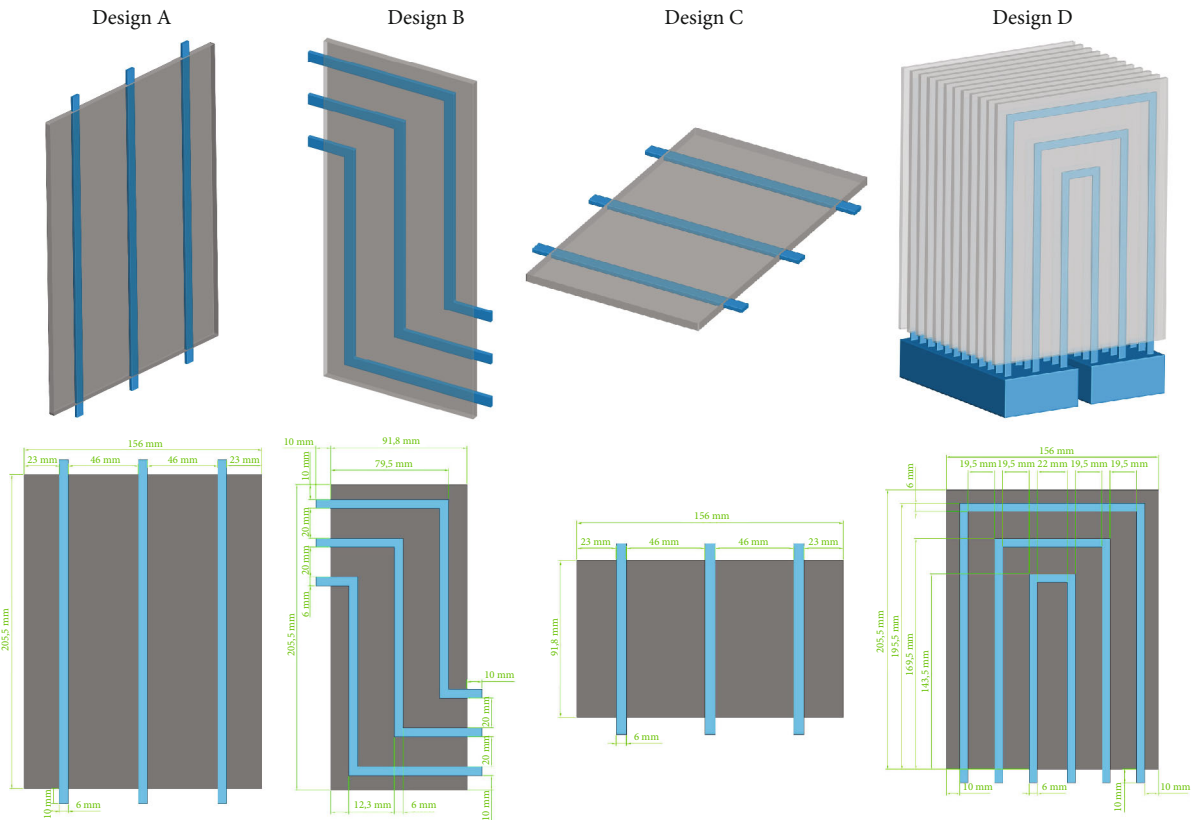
Geometry parameters of the cold plates in the four designs.
